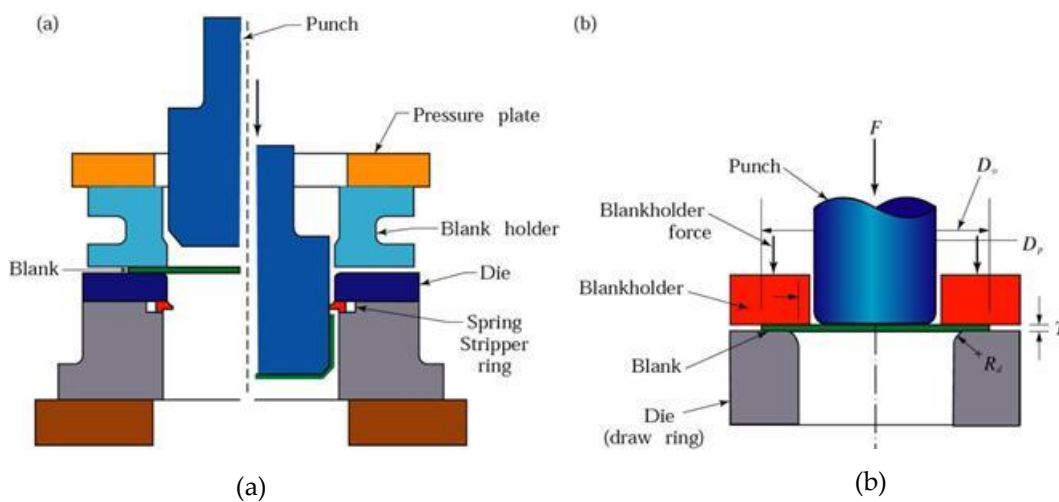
(a) Schematic illustration of deep-drawing process on a circular sheet metal blank (b) Process variables in deep drawing (Source: Kalpakjian.S, Schmid.S.R., Manufacturing Engineering and Technology, 2006, 4th Edi, Pearson Edu.)
